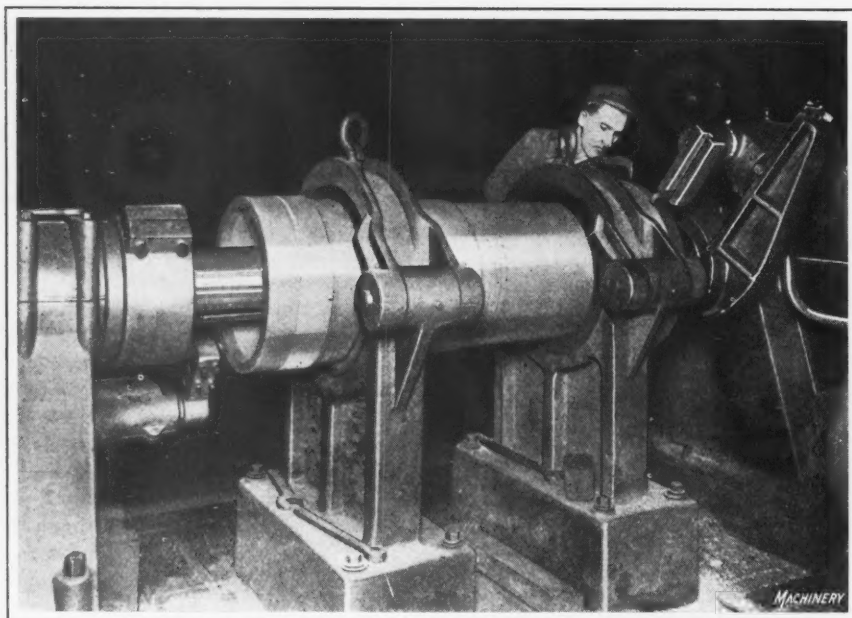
Finish-facing and boring the Cylinder Liner, turning the Flange, and cutting Packing Ring Grooves
